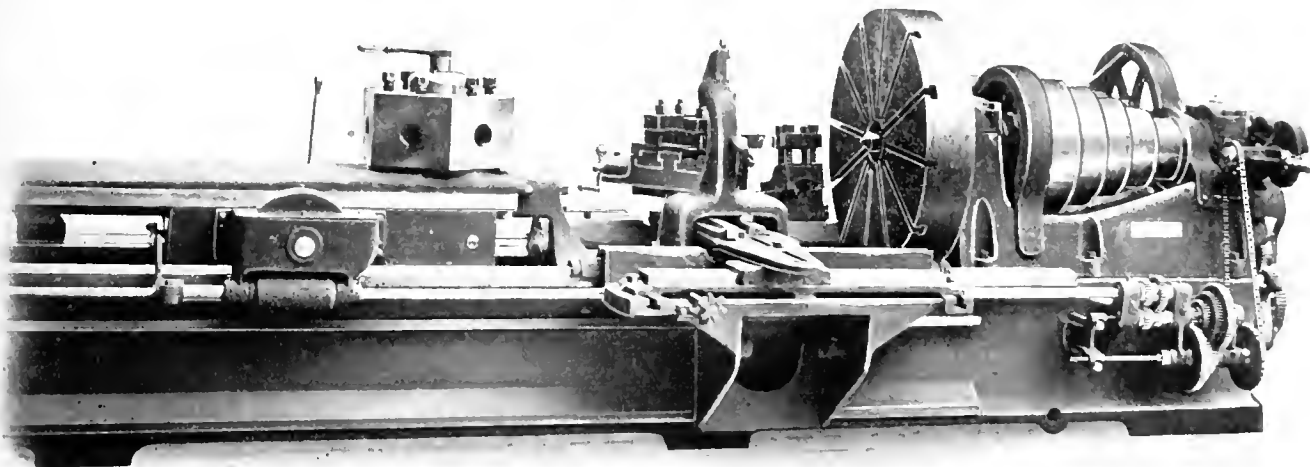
Rear View of Lathe, showing Special Feed Mechanism for Turret Lathe.
